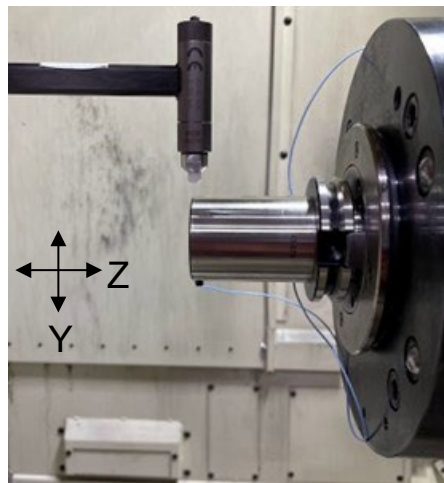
The artifact-spindle-machine receptances are measured for each machine spindle in the x and y directions. Inverse RCSA is used to remove the effects of the portion of the artifact extending past the flange to isolate the spindle-machine dynamics.
